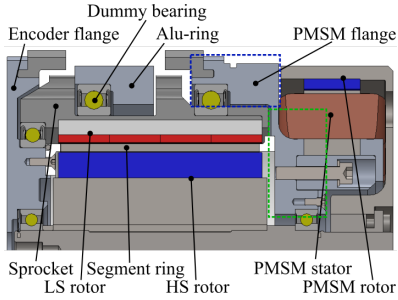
MagCon V1 cross section with dummy bearing and -flange used during loss tests [5].
